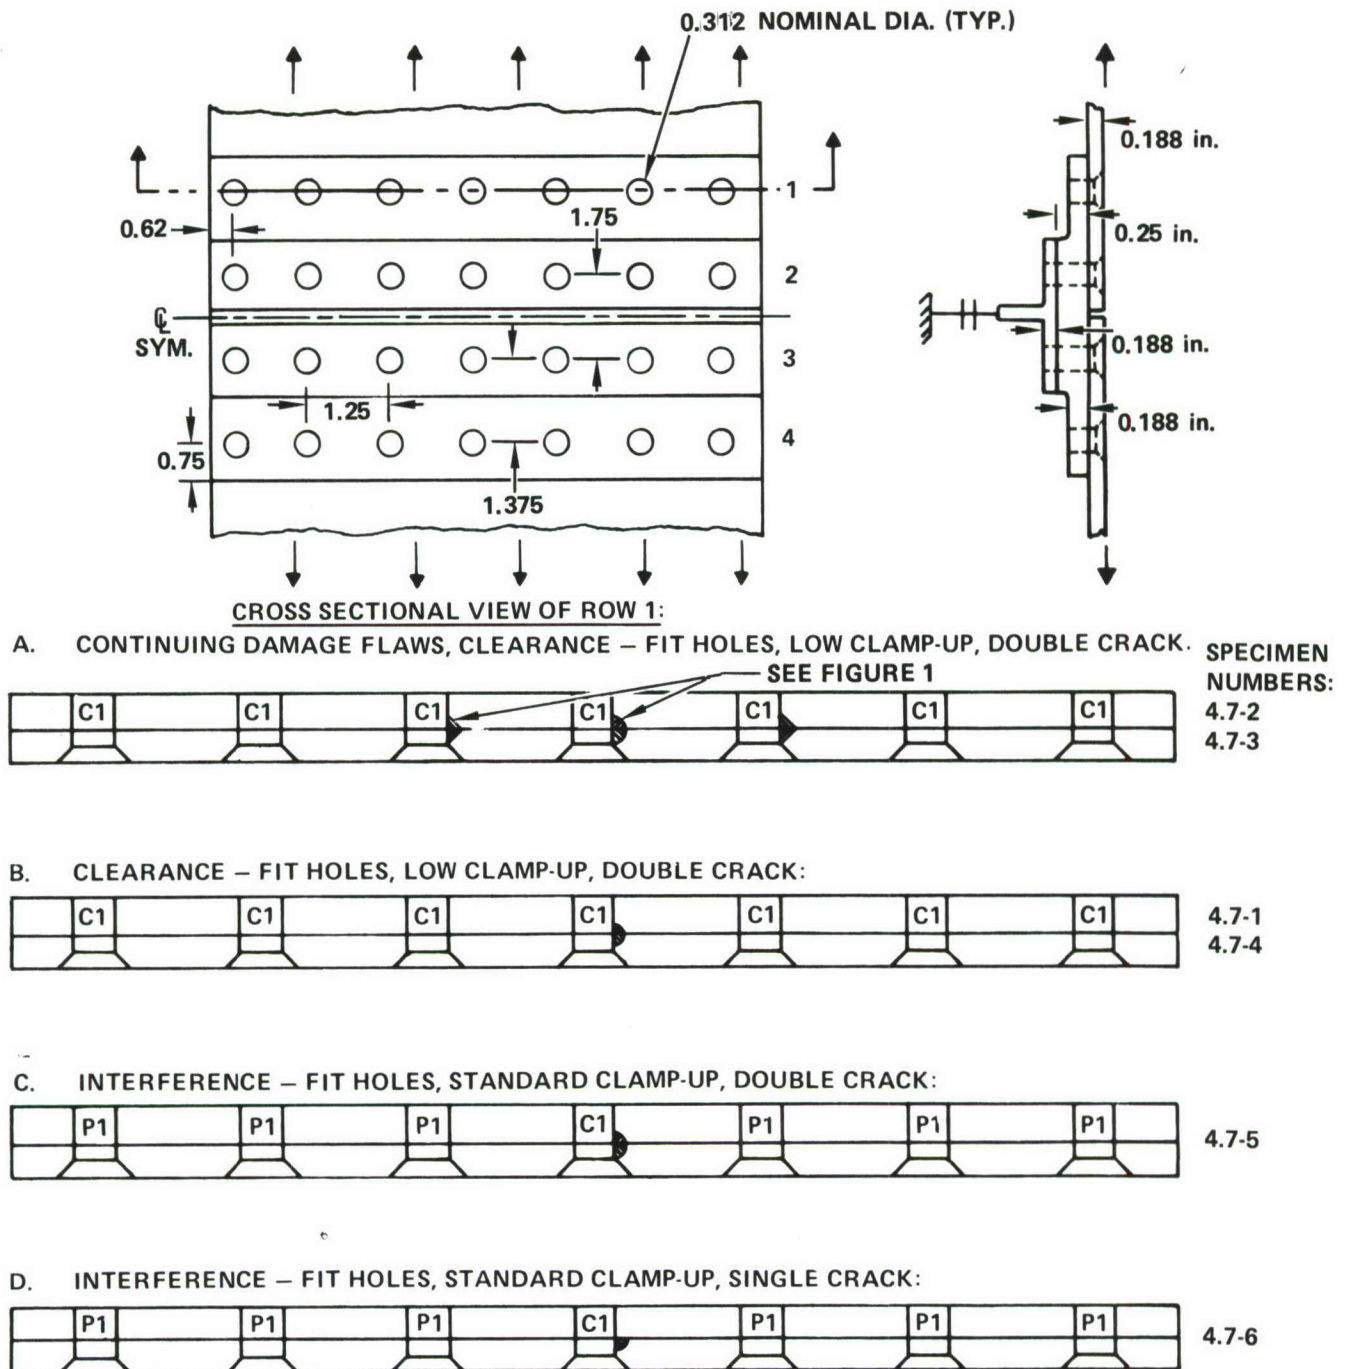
Summary of Initial Damage Conditions, Single-Lap Shear Specimens
